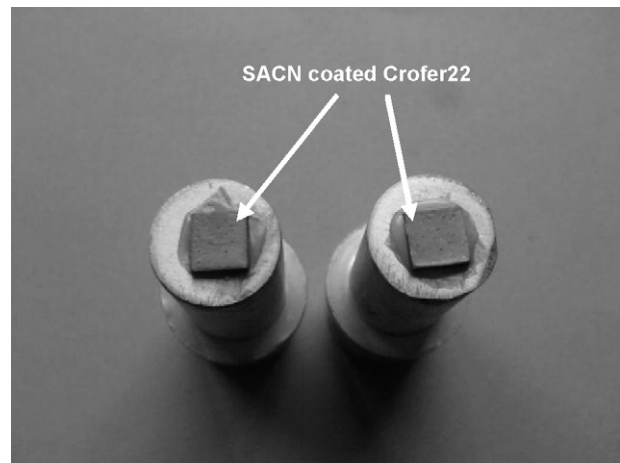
Fracture surfaces of Crofer22 APU/SACN.
